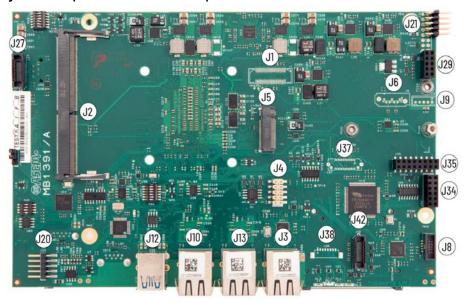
Jumper Connector Locations: Bottom View of Motherboard MB1391/A
